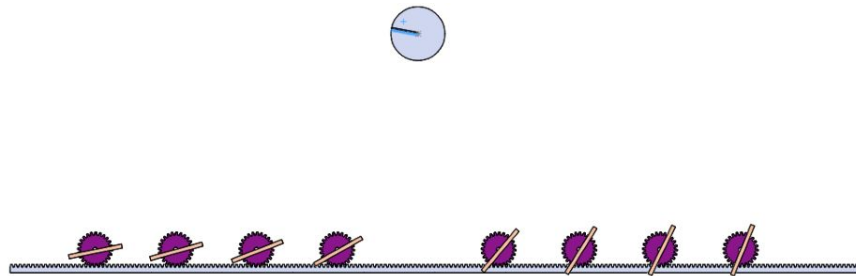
SolidWorks Design for the strips (Front View) Sunset Position
